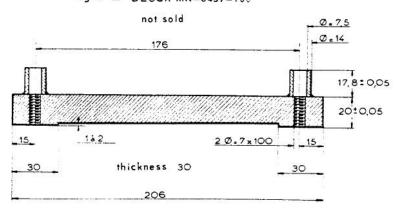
ASSEMBLY OF THE BLOCKS
